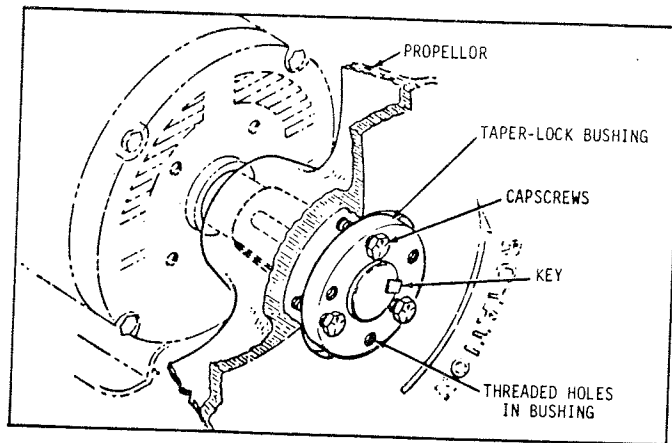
CUTAWAY VIEW OF TYPICAL PROPELLOR INSTALLATION
